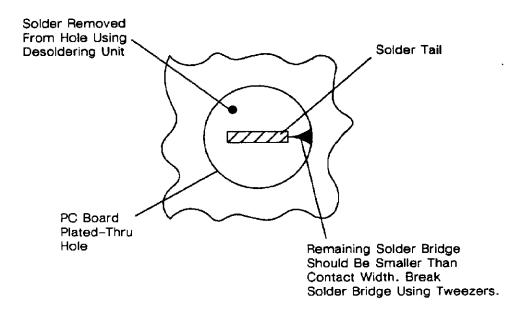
Removal Of Solder Bridges After Desoldering Tail And Hole
